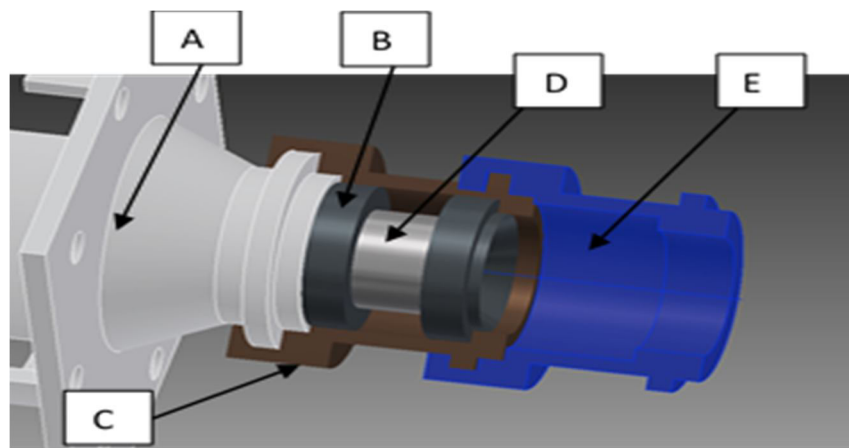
Fabricated rotor and stator parts of MUAFM
